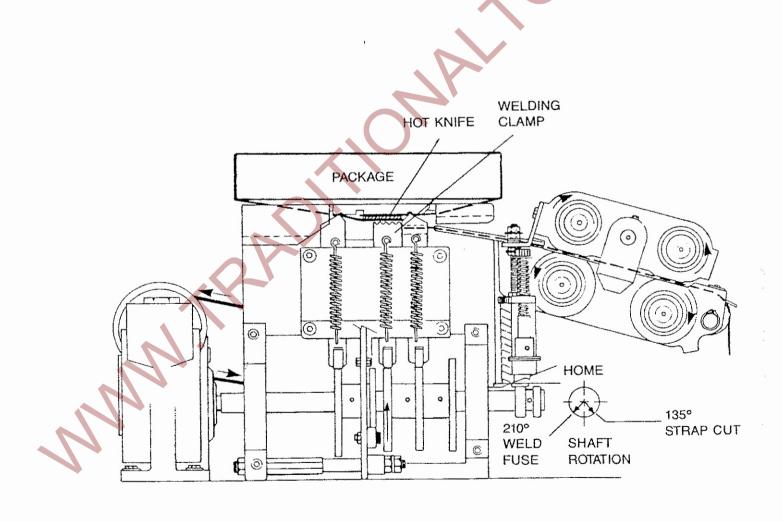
STRAP IS CUT & WELD IS MADE
